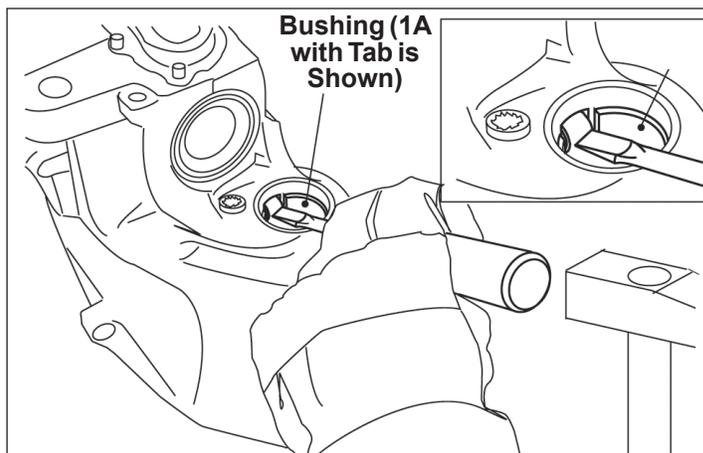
Tab Removal For Bushings Where A Tab Is Used
